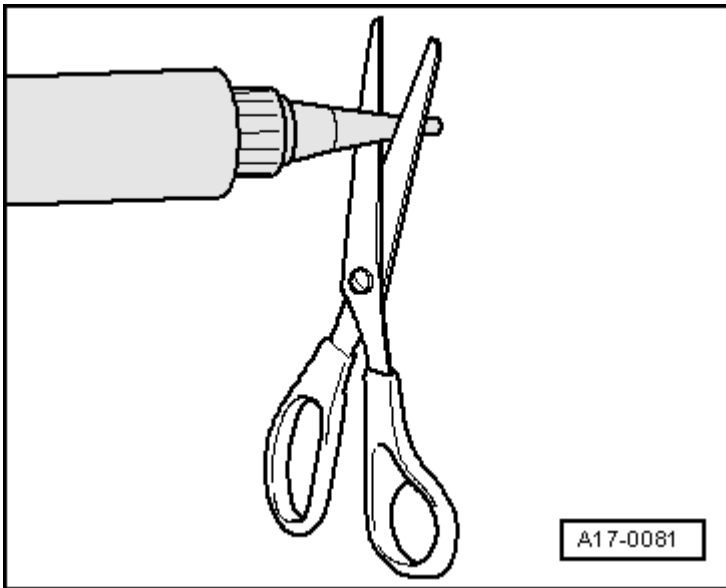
Identifying Scissors To Cut Tube Nozzle At Front Marking (Nozzle Diameter Approx. 3 Mm)
